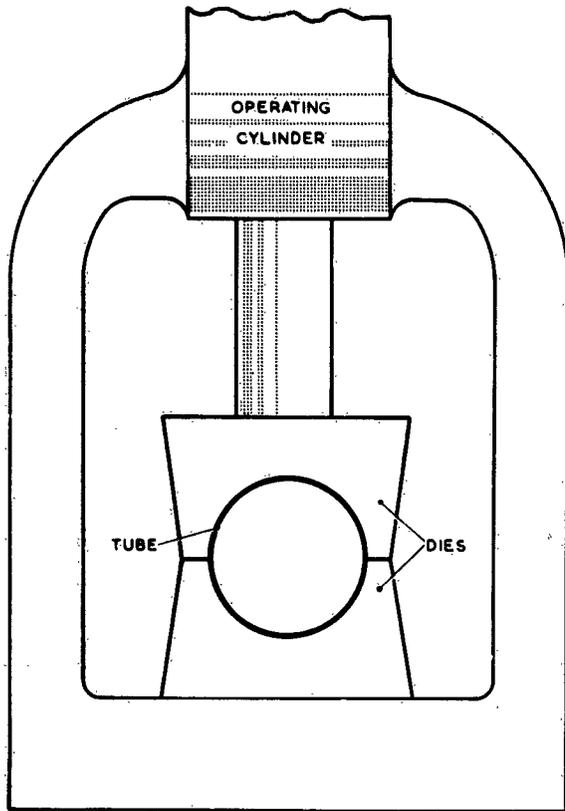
CECO dropstamp used for sizing external diameter of tube
